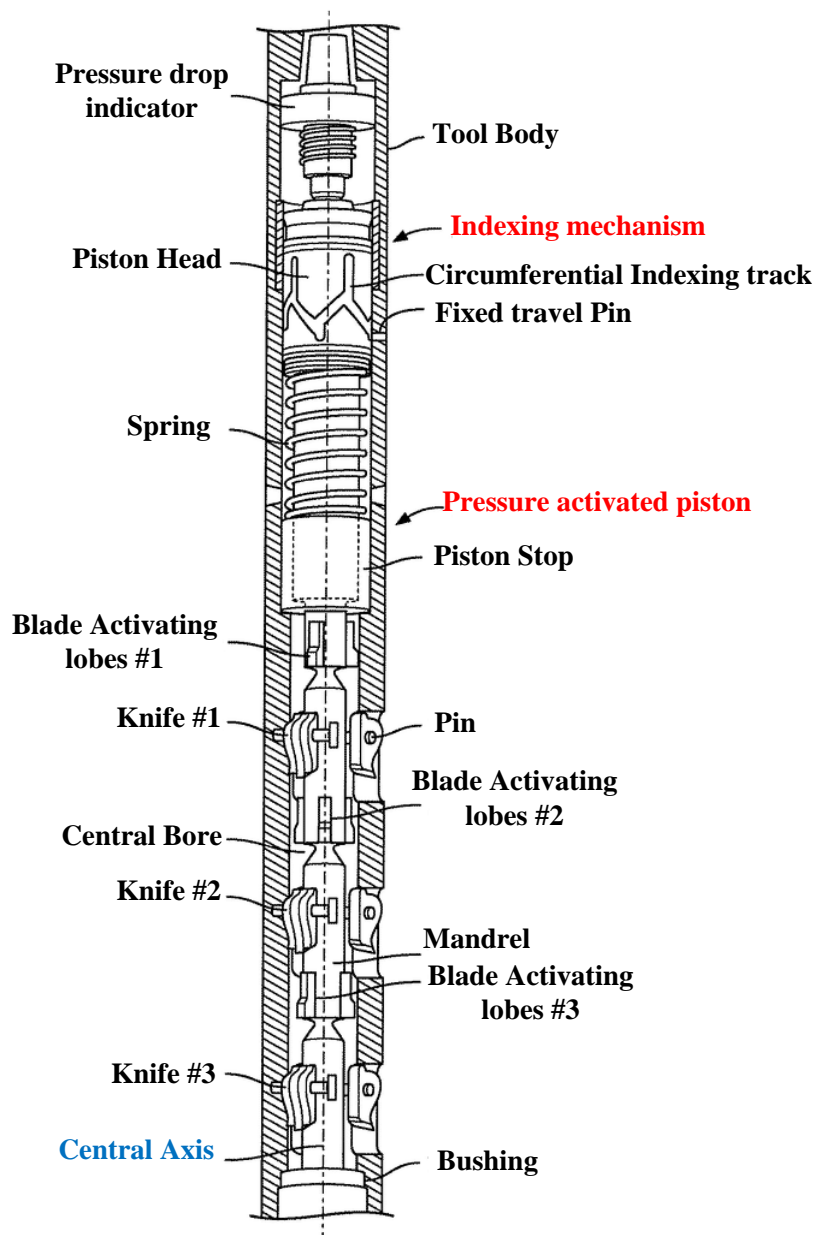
Bottom Hole Assemblies for multiple cut and pull operations [49].
